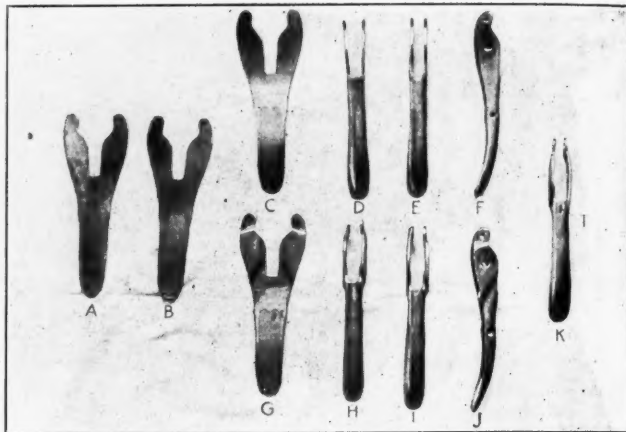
Steps in the Evolution of both Inside and Outside Plier Handles
